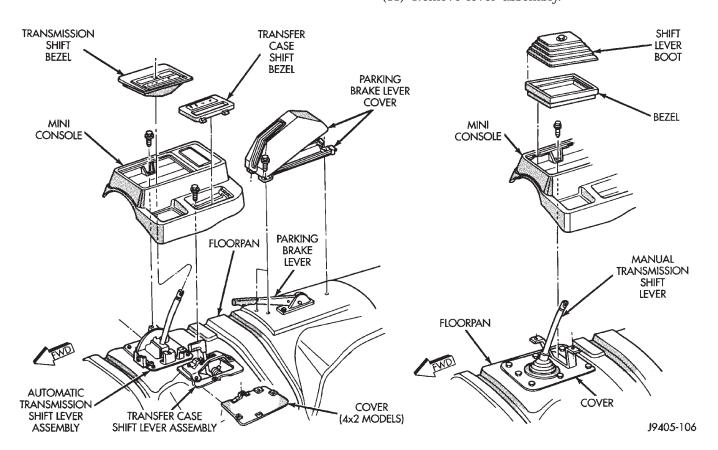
Mini Console And Parking Brake Lever Cover (XJ)
